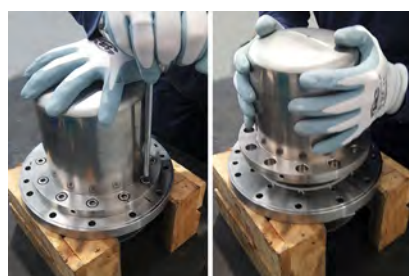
Where present, loosen the screws (914) and remove the isolation shell (157).
